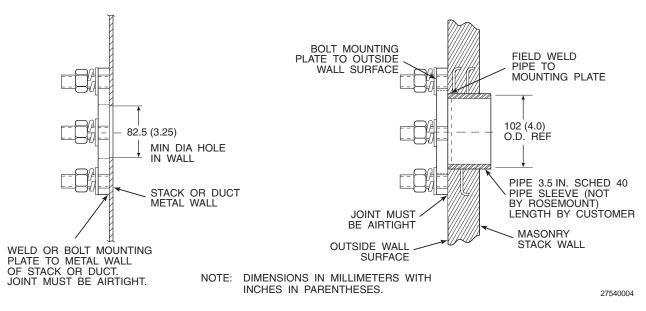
Hazardous Area Oxymitter 4000 Mounting Plate Installation
